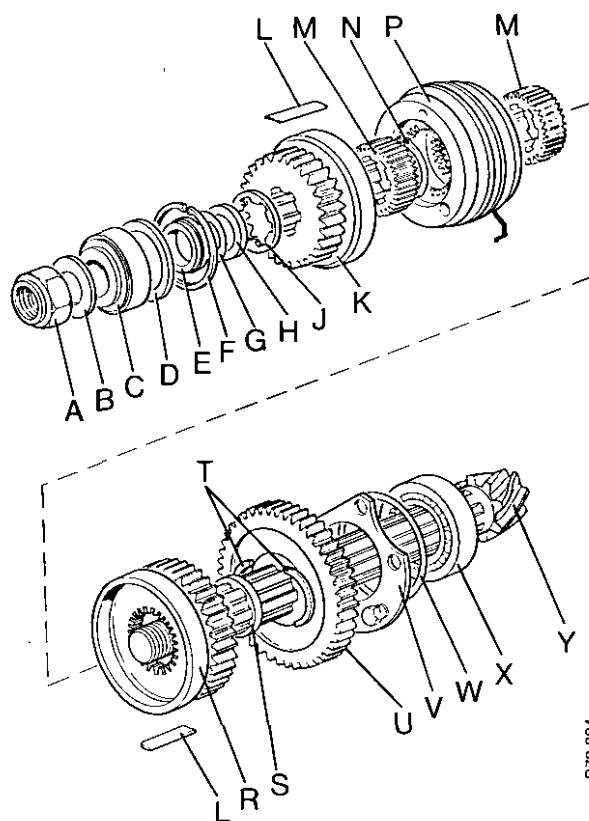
BEVEL PINION SHAFT ASSEMBLY
